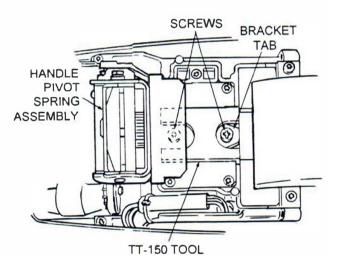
Use of Tool TT-150 During Handle Pivot Spring Assembly
